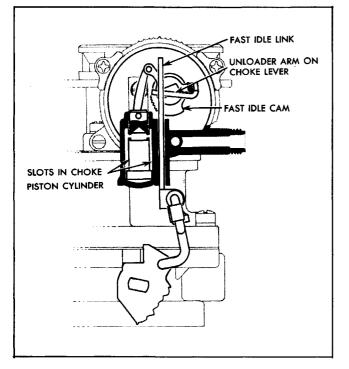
B-9 Choke Circuit (Fast Idle Cam)-Carter
